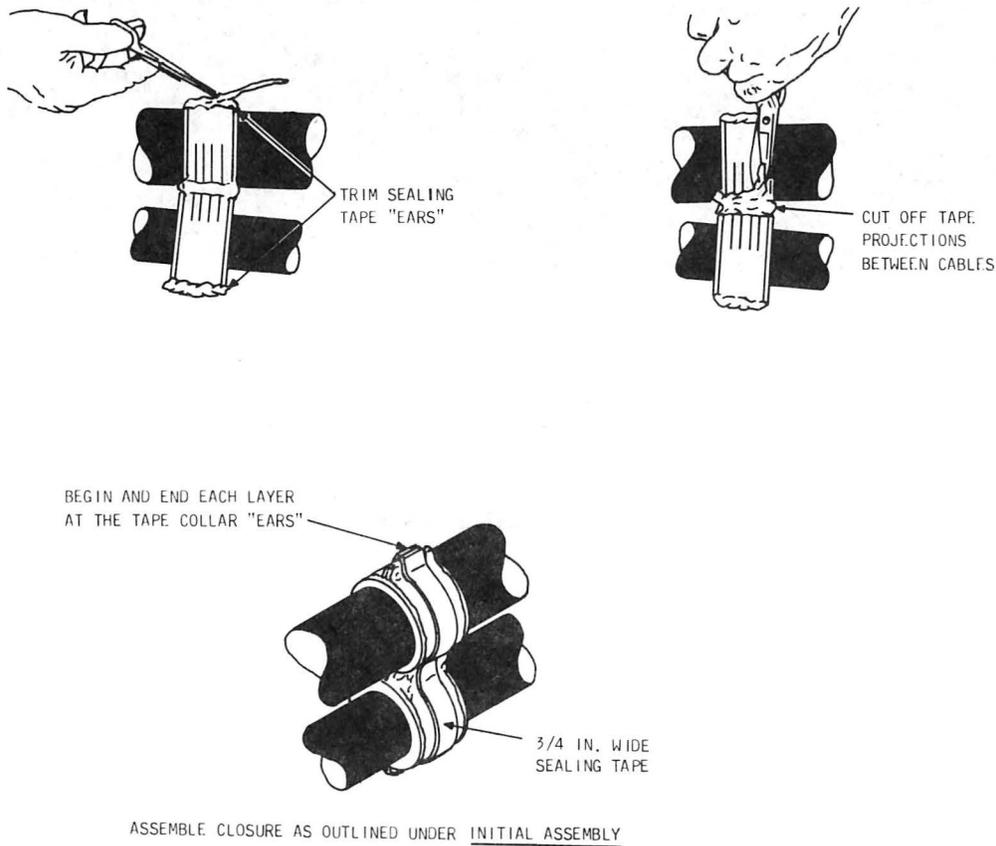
Installation of Closure Using D-180995 Kit of Parts
